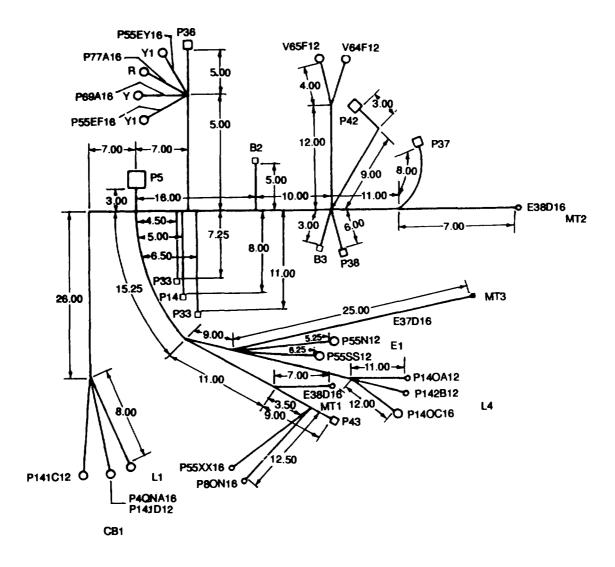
Engine Wiring Harness Assembly, Drawing No. 72-2267 (Sheet 2 of 2)
